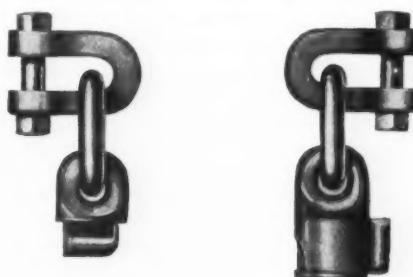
The Parts of the Coupler After Breaking the Connection.
